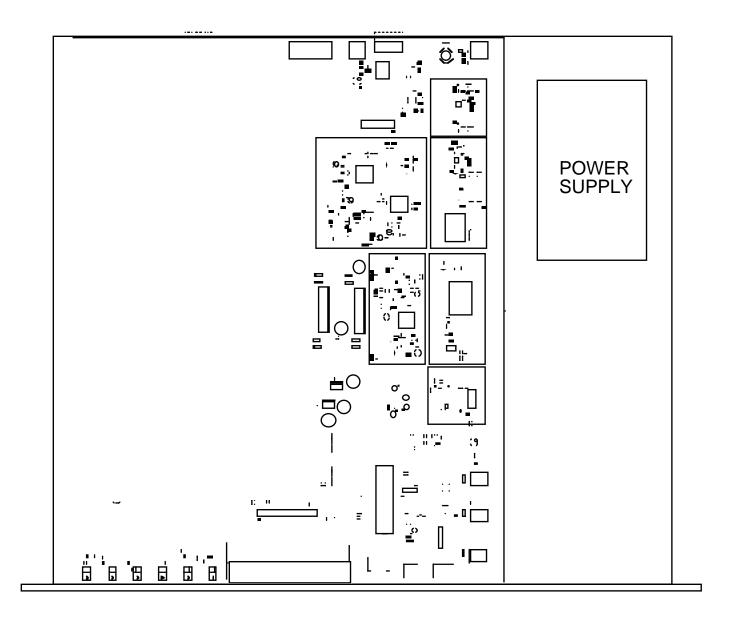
3116-7984-720-400# Mechanical Assembly
